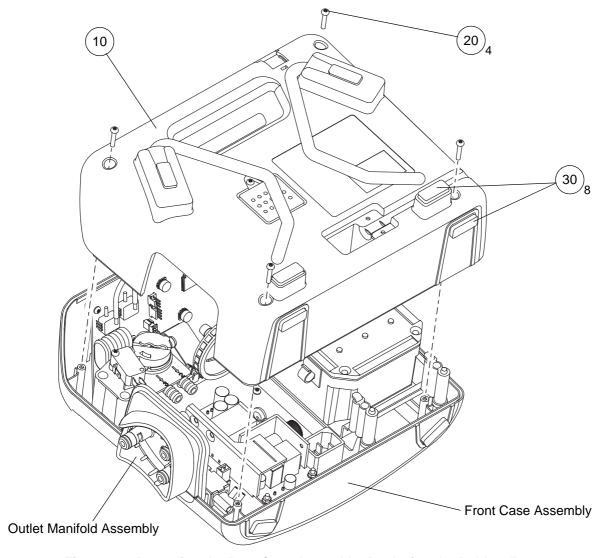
Removing the Rear Case Assembly, Replacing the Rubber Feet
